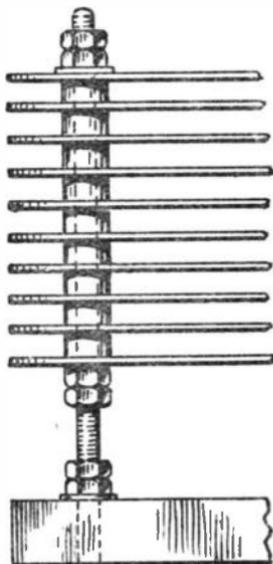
Enlarged view showing the assembly of the fixed plates upon the side rods.
